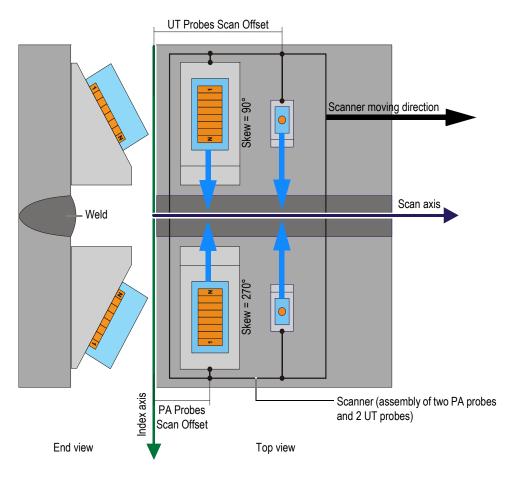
Weld inspection using a scanner with 90° and 270° probe skews
